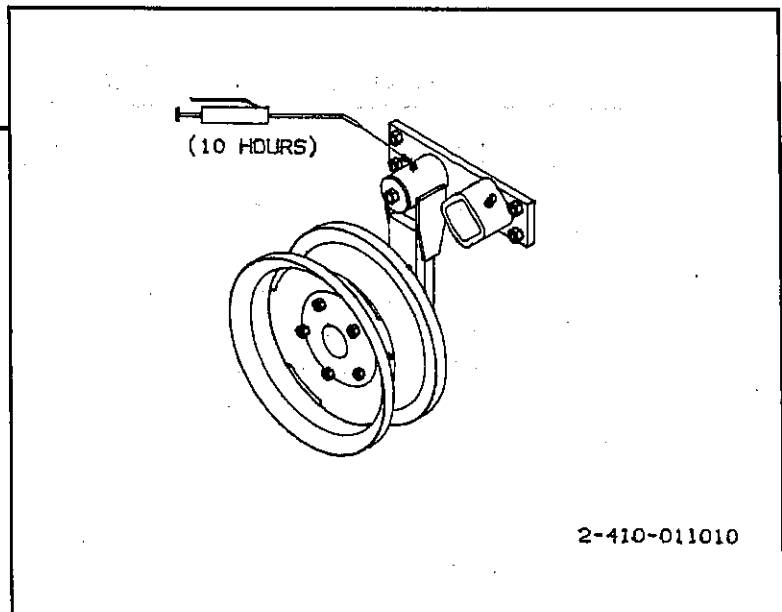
Plow Lubrication Points - Gauge Wheel
